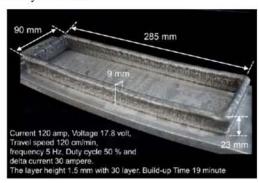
Workpiece by the Suitable DP-GMAW Parameters
